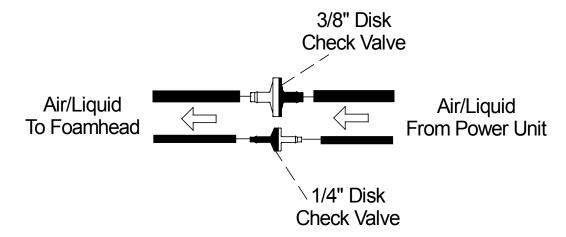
BOOM TRACKER Boom End Disk Check Valve Installation
